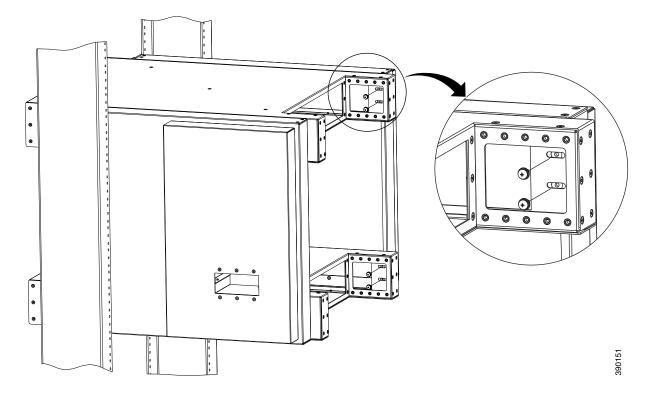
Attaching the Air Deflectors on the Cisco ASR 9904 Router Chassis —Top View
